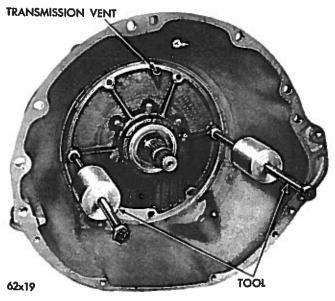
Removing Front Oil Pump and Reaction Shaft Support Assembly (Tool C-3752)
